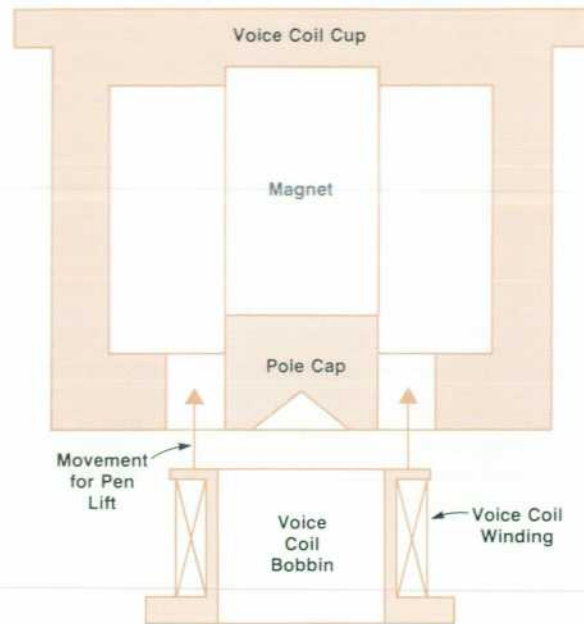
Linear actuator magnet, voice-coil cup, pole cap assembly, and voice-coil bobbin for pen-lift mechanism.
